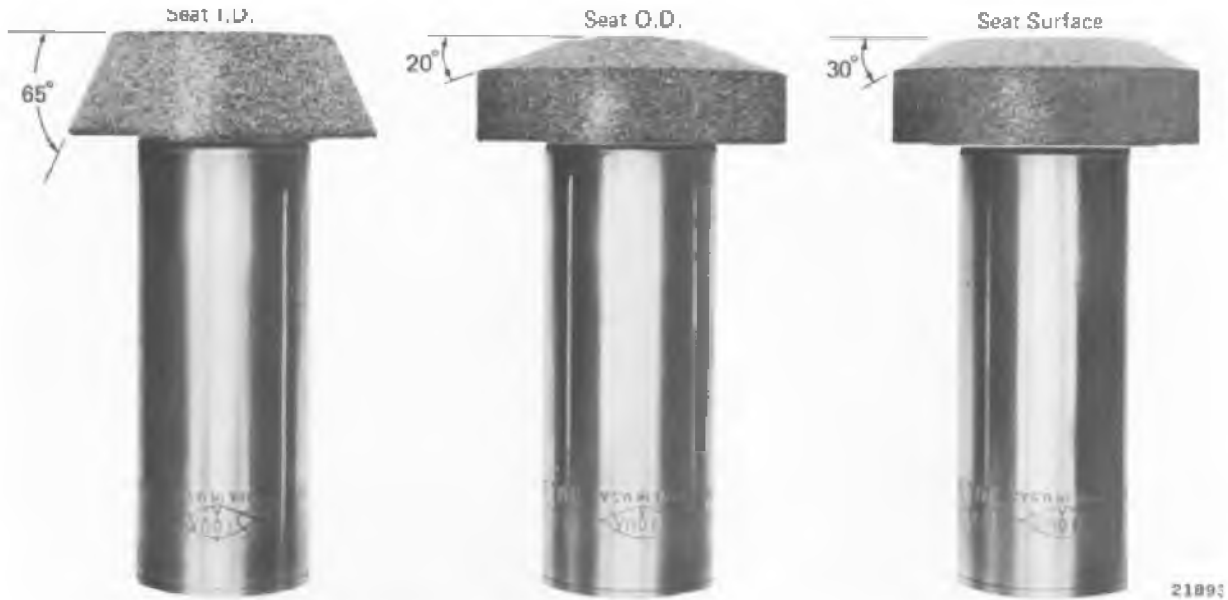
Valve Seat Grinding Wheels And Holders
